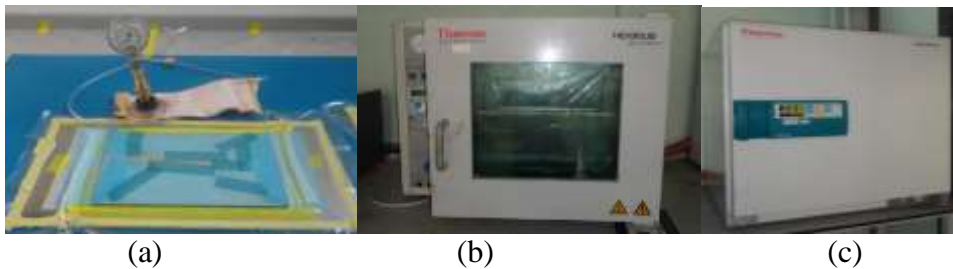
,(a)Vacuum Bagging,(b) Degassing machine,(c)Curing chamber
